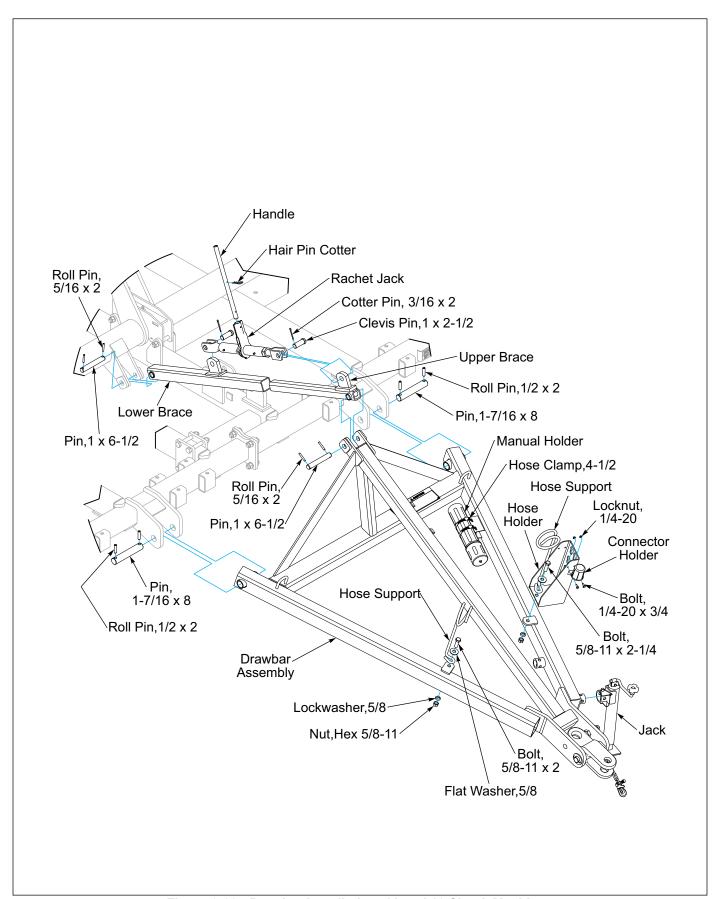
Drawbar Installation, 11 and 13 Shank Machines
